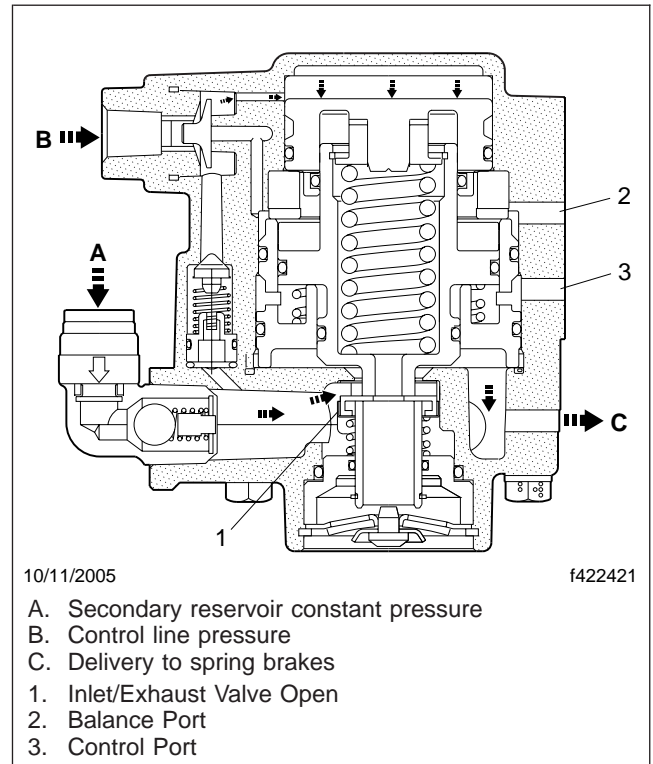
, Charging the Spring Brake Actuators Below 107 PSI (737 kPa)
